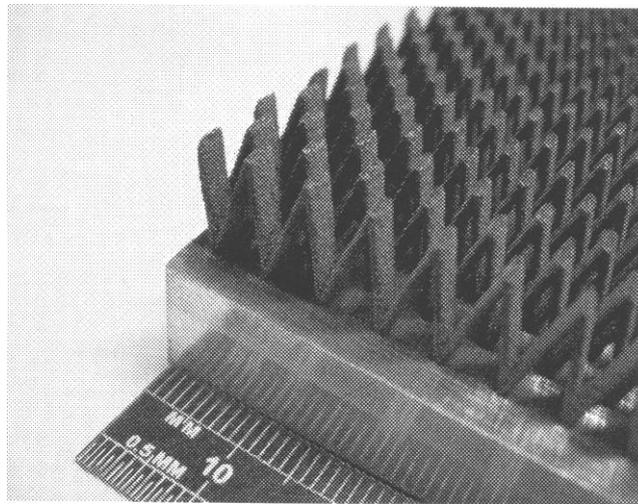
Heat sink test parts made using SLM (Wong *et al.* 2007).
